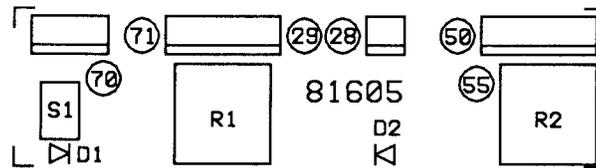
LOWER POT. BOARD COMPONENT LAYOUT (81605)
